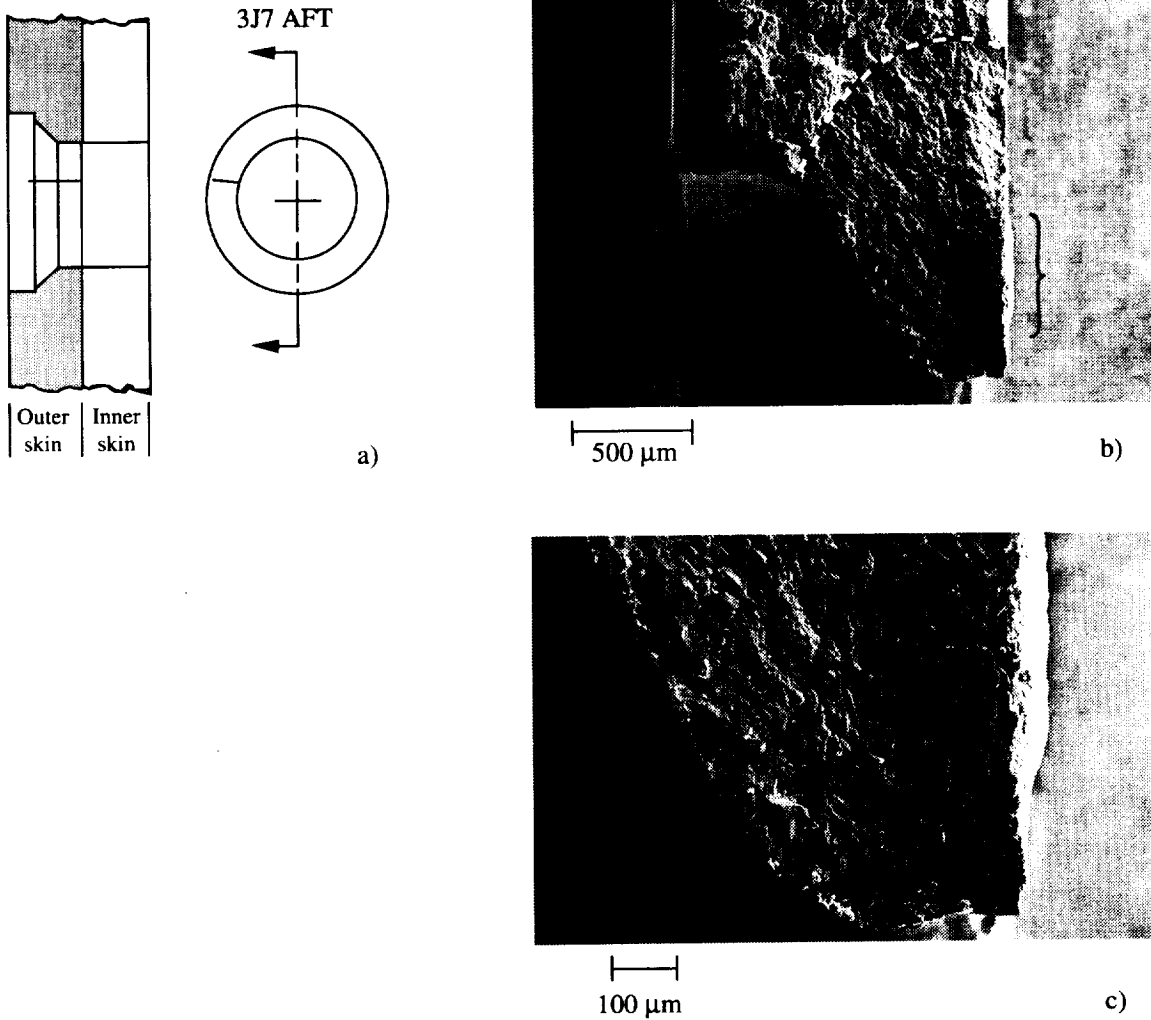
a) The schematic shows the rivet hole 3J7 configuration and the location of the outer skin fatigue crack oriented in the aft direction above the 9 o'clock position. b) The SEM micrograph shows the fatigue crack at the rivet hole (bottom). The bracket shows the likely crack initiation region along the faying surface and the dashed line marks the fatigue crack front. c) The SEM micrograph shows the fatigue crack fracture surface at the rivet hole shank region.
